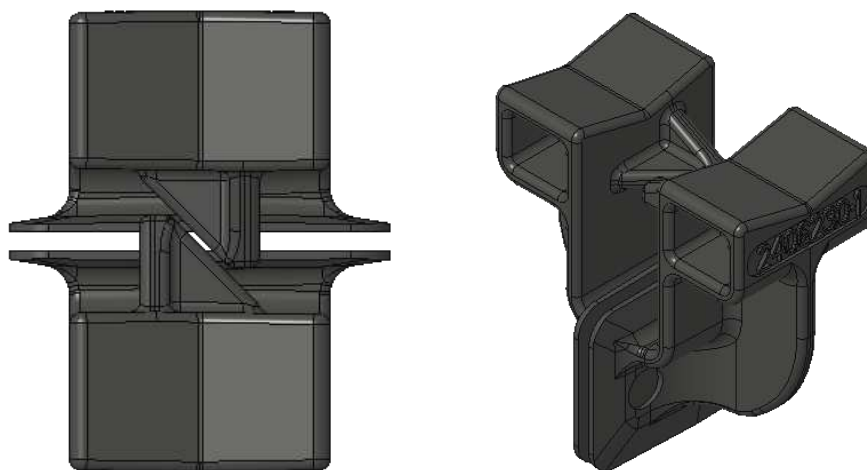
Edge-mount bracket back-to-back configuration (P/N 2406230-1)
